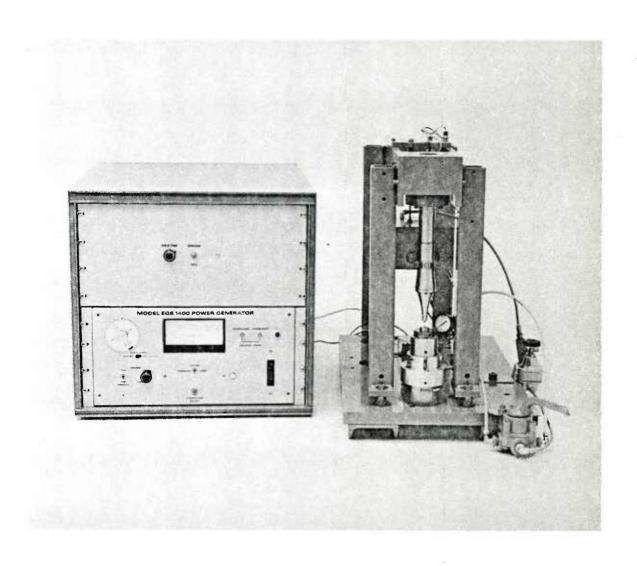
Ultrasonic ring welder Model 2812 with EGB 1400 frequency converter.
